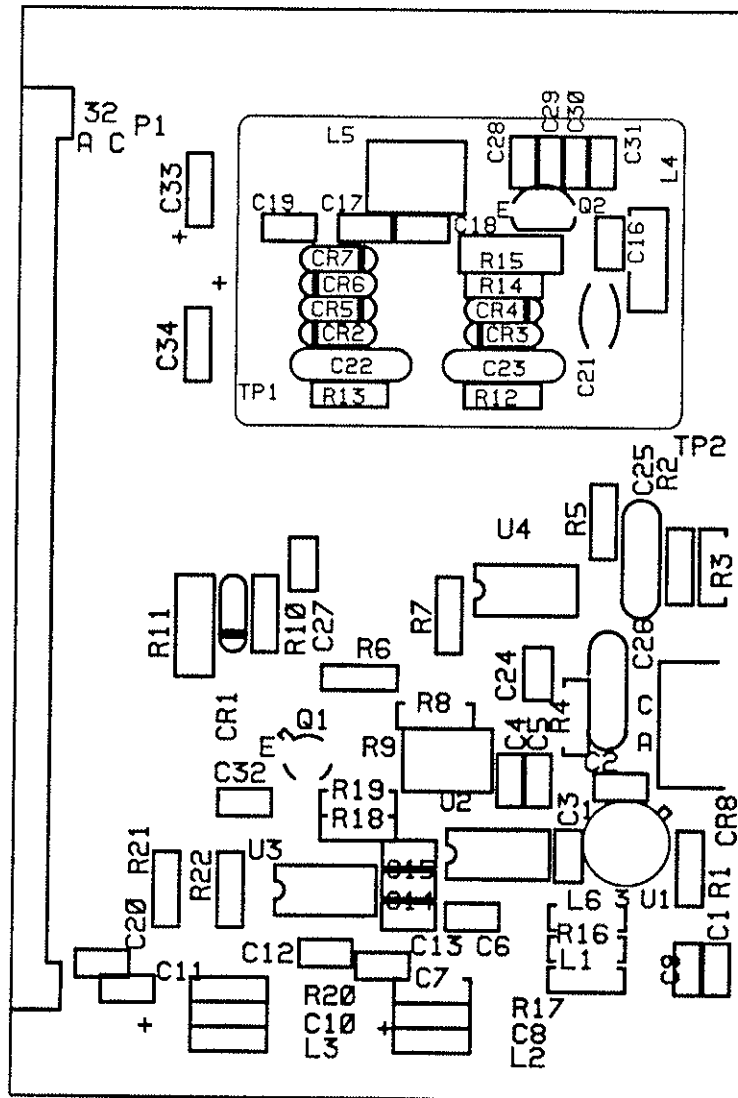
Component locator drawing, RFL 97 FO RX-8M 850-nm Multimode Fiber Optic Detector Head
